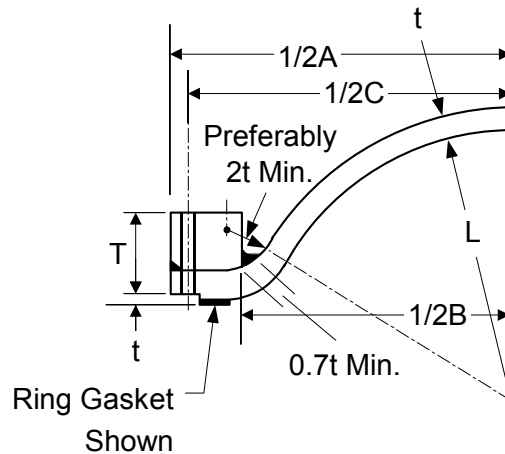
Type B Spherically Dished Cover with a Bolting Flange
